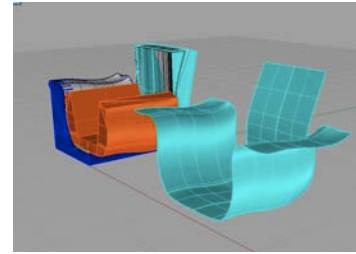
Rhino model of the chair and parts for the mold to be milled
